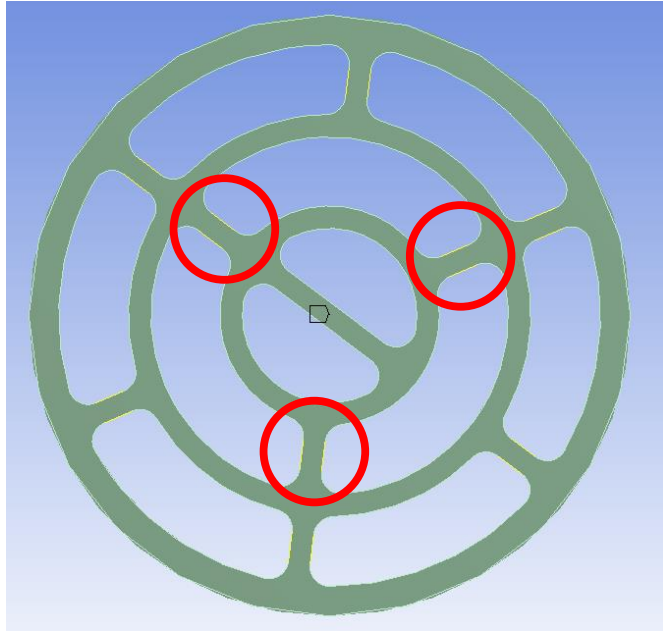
Test 3 - one endplate faced fixed, inner webs fixed
